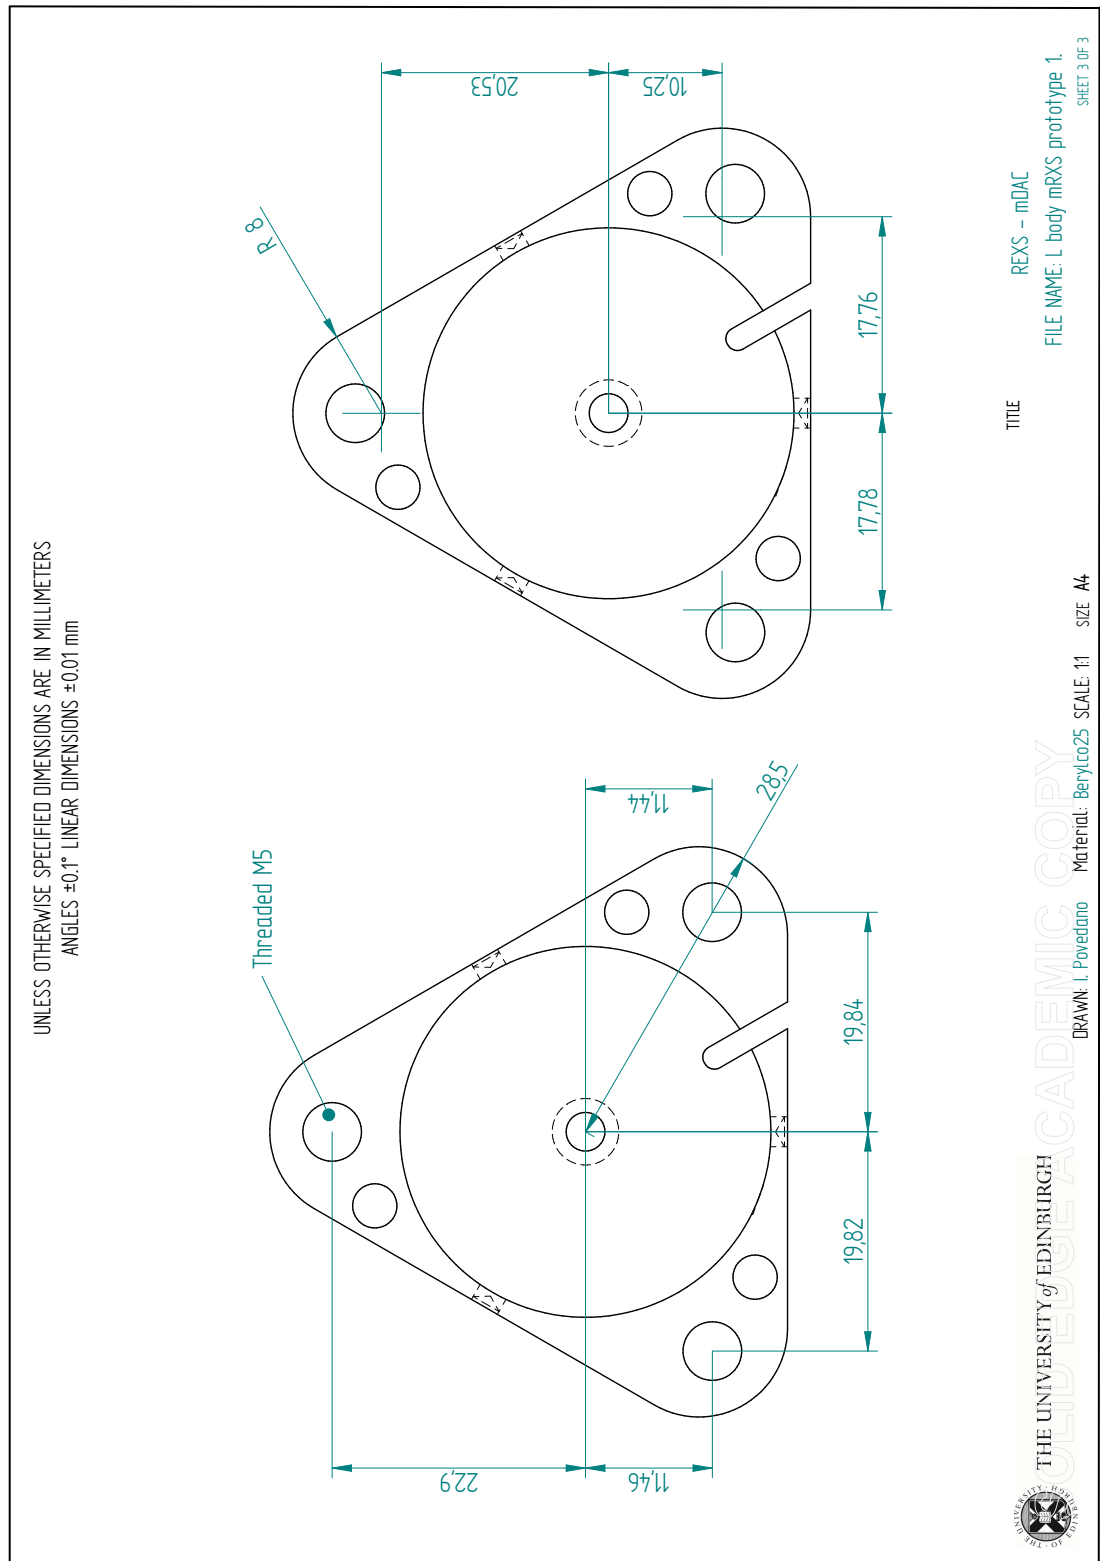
Lower body mRXS prototype 1. Sheet 3 of 3.
